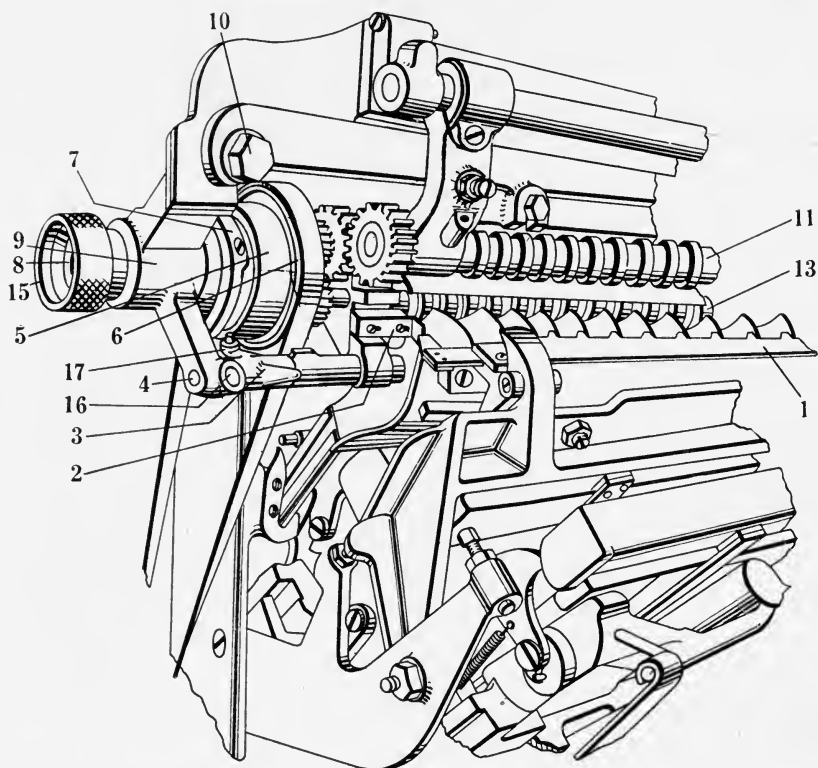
Distributor Driving Clutch which is used on all Intertype machines. Part of the channel entrance is also shown. The clutch drives the distributor screws and is provided with a means for disengagement to render it inoperative in case a matrix fails to properly clear the channel entrance partitions and the distributor screws, in dropping from the distributor combination bar.
